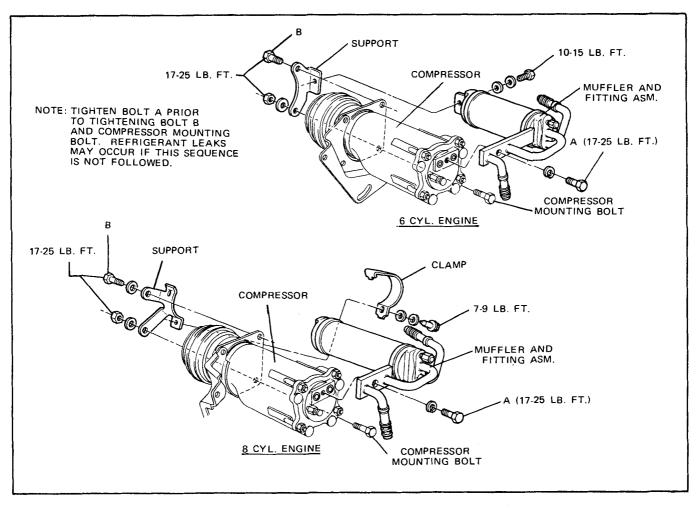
A-55 A and G Series Muffler and Compressor Fittings Assembly
